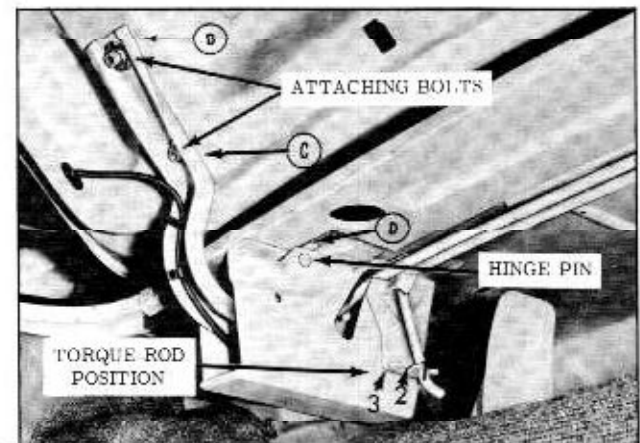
Rear Compartment Hinge and Torque Rod
